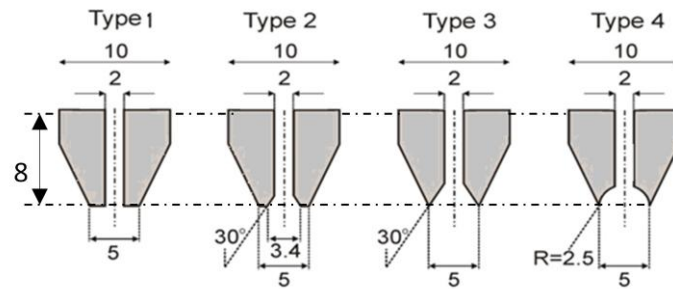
The schematic view of the melt nozzles set 1 and internal/external geometry. (Dimensions are in mm).
